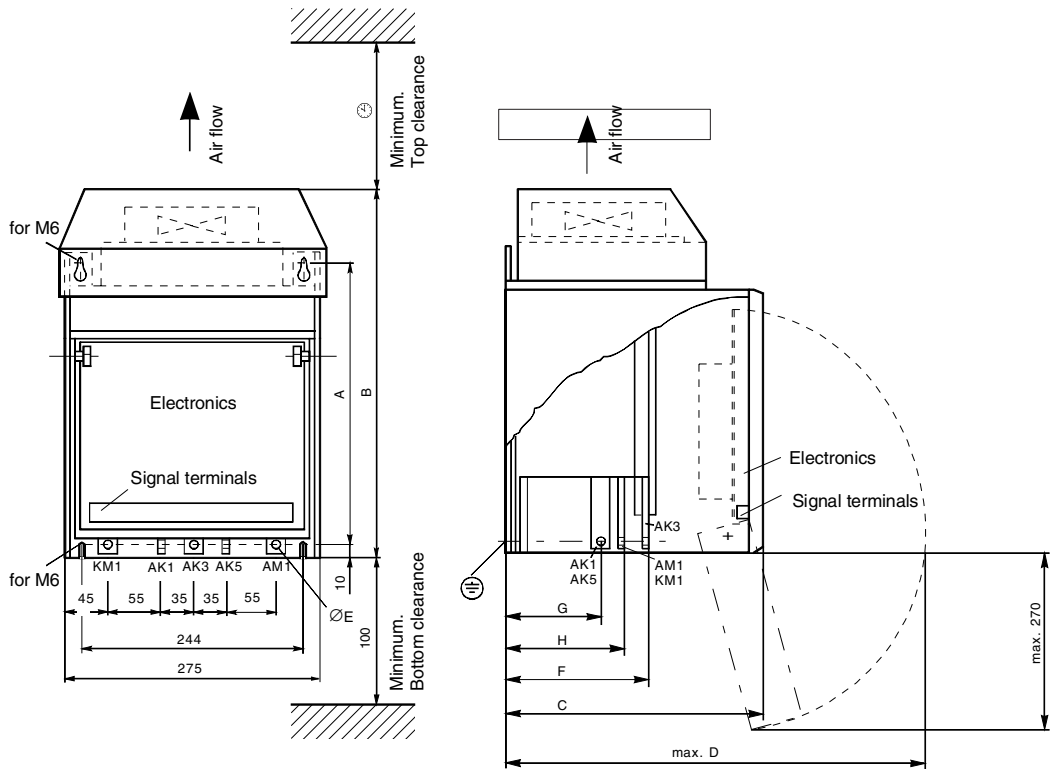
/10: Dimension drawing C4-Module with AC/DC power connection Left-hand side
